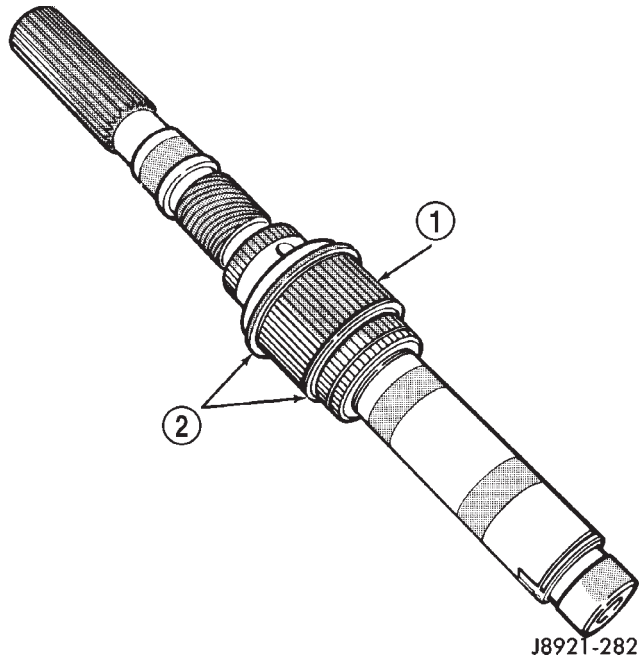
Installing Mainshaft Bearing Rollers and Spacers
